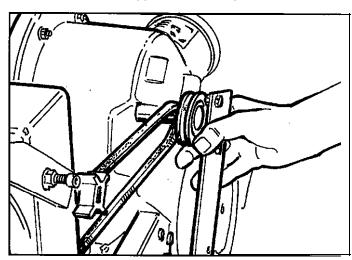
Loop Slack End Of Drive Belt Over Drive Shaft And On To Drive Pulley
